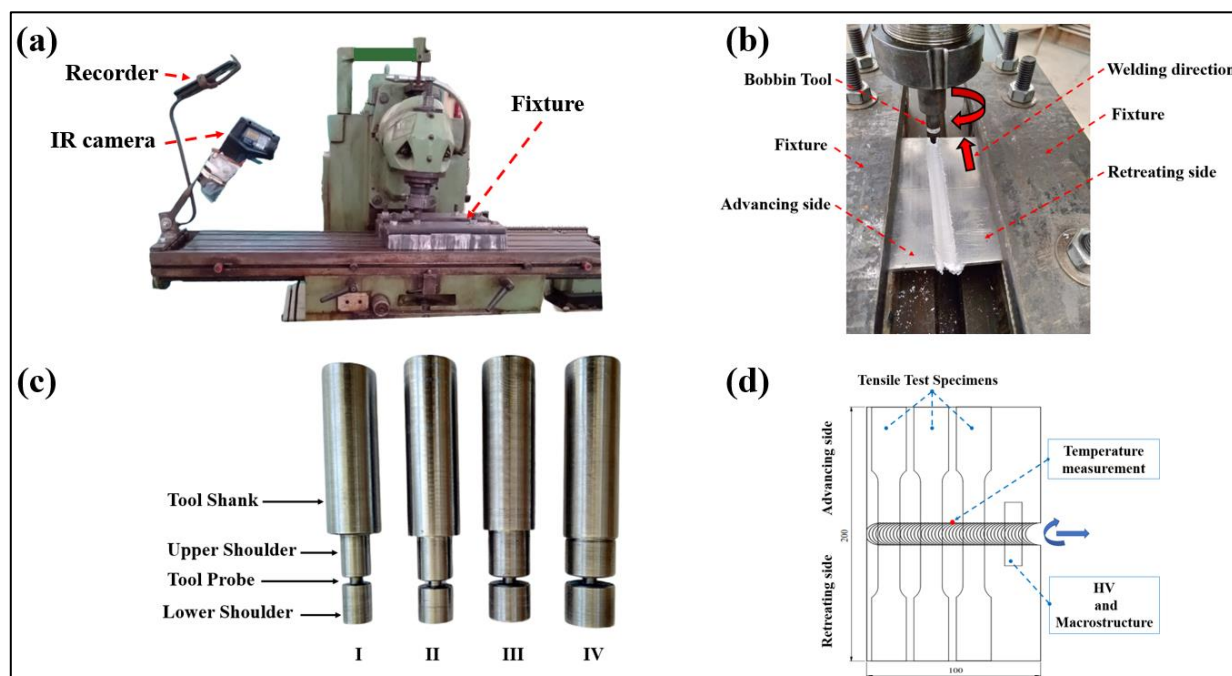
a) Test Rig Description, b) welding process, c) Tools manufacturing, and, d) workpiece design
